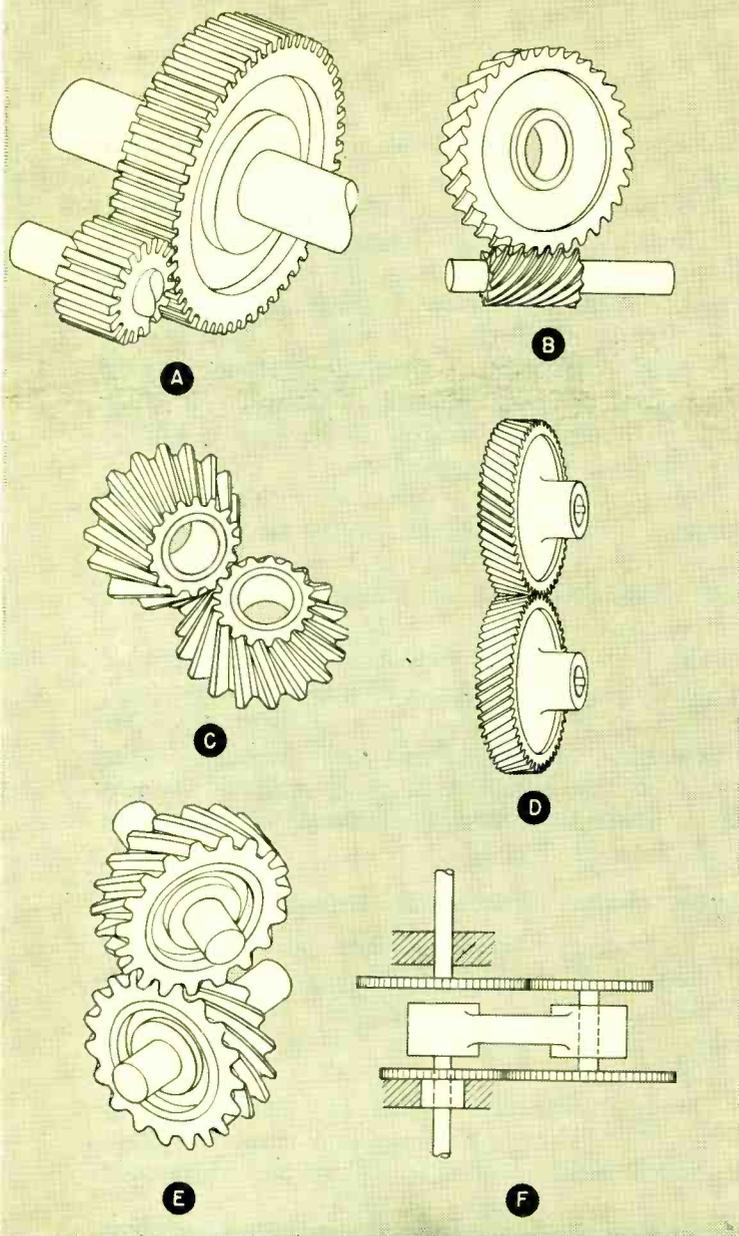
Types of gears used in electronic equipment: spur (A), worm (B), bevel (C), helical (D) and spiral gears (E). Also shown is planetary or epicyclic gear train
